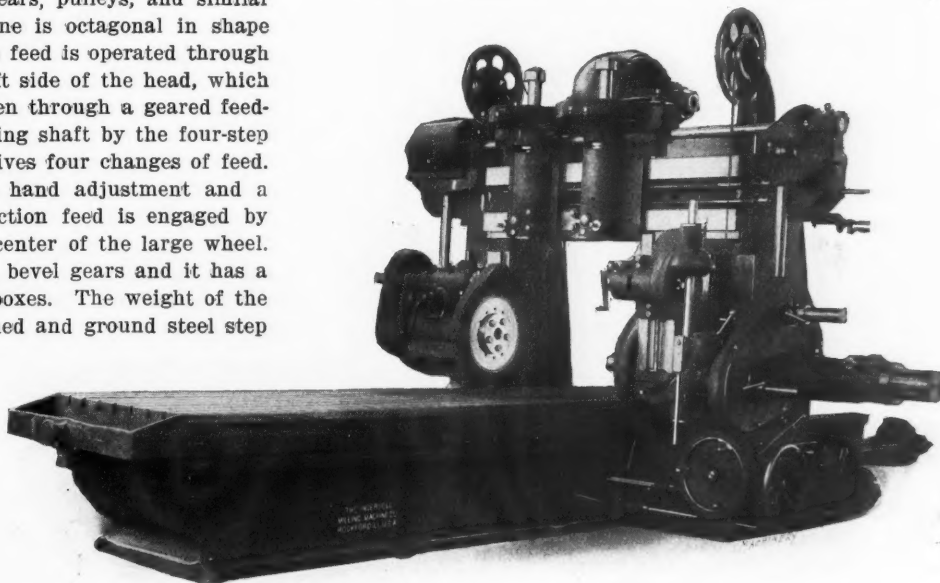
Ingersoll Five-head, Six-spindle Milling Machine
